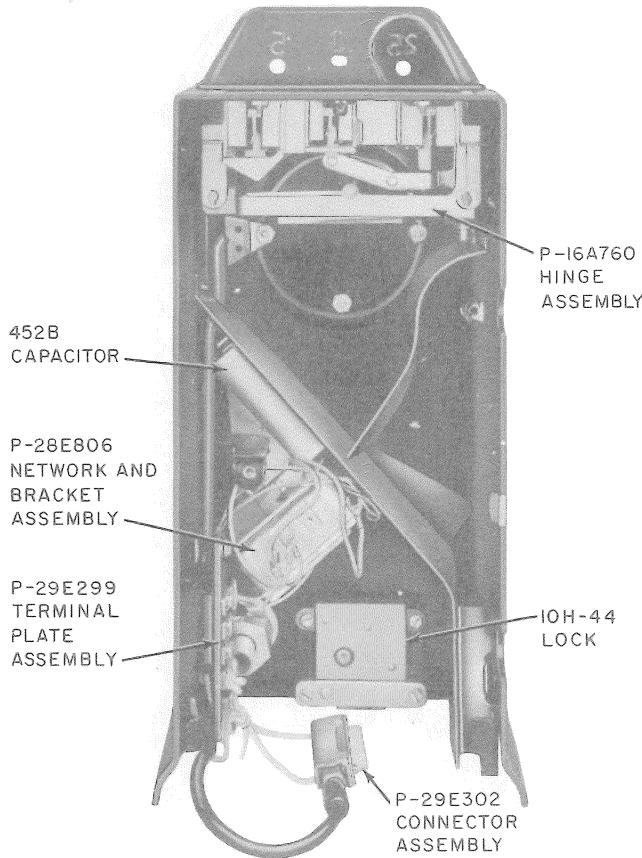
Upper Housing With Gong Signal and Chute Assembly Removed
